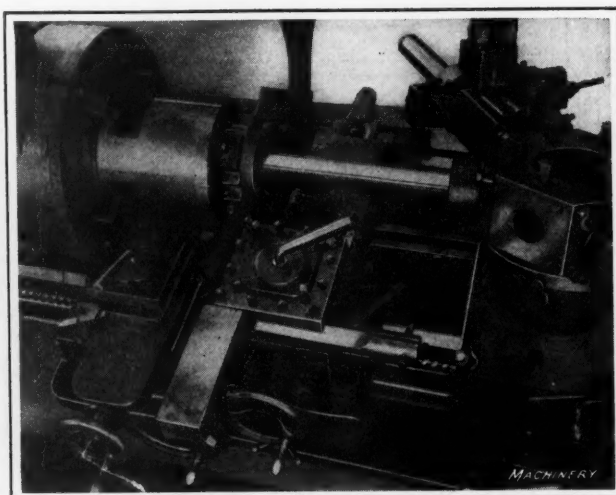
Detail View showing how Motor Frame is held for Second Operation
